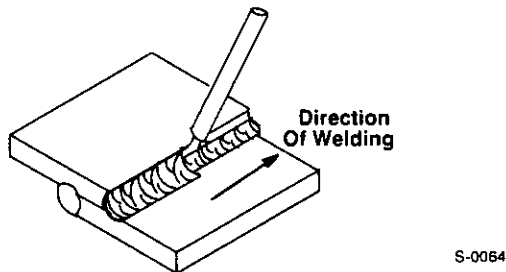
Tee Joint Fillet Weld Weave Patterns
